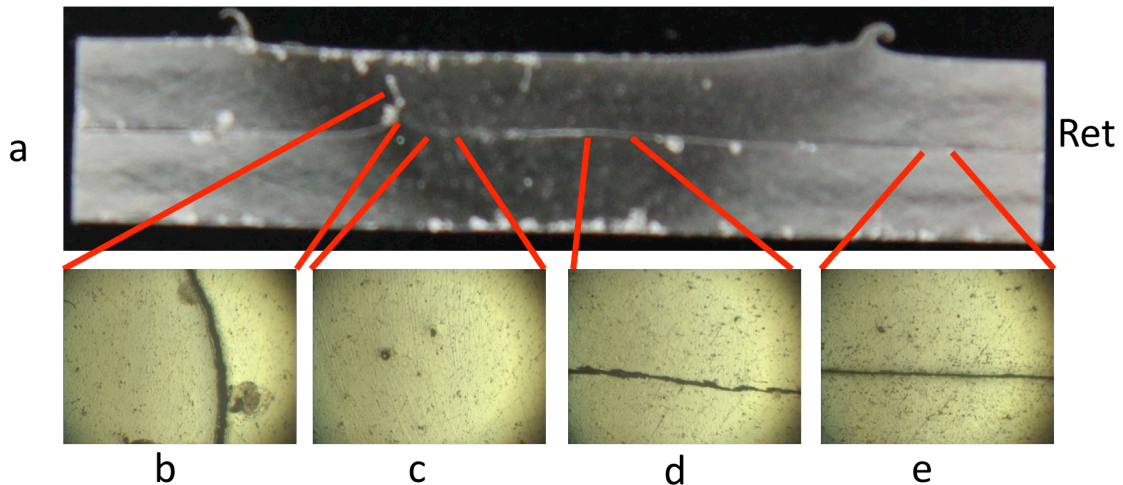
Weld 1: 10 ipm 2000 rpm 65% parent UTS, a) 1x image of weld zone, b) 10x view of the hooking defect on the advancing side of the weld, c) 10x view of material within the weld zone, d) 10x view of joint line remnant within the weld zone, e) 10x view of gap between parent plates (unwelded)
